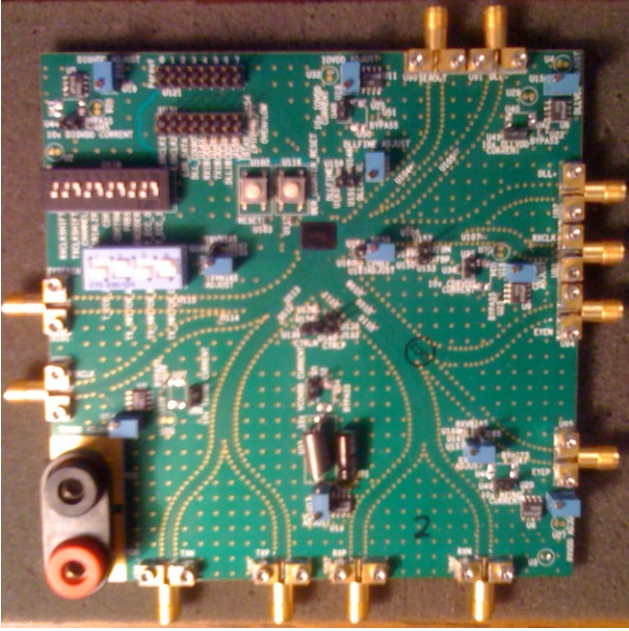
Five inch, 4-layer Rogers 4003 dielectric PCB test board with test chip die mounted using a chip-on-board (COB) process. The die is protected underneath the black encapsulation rectangle at the center of the test board.
